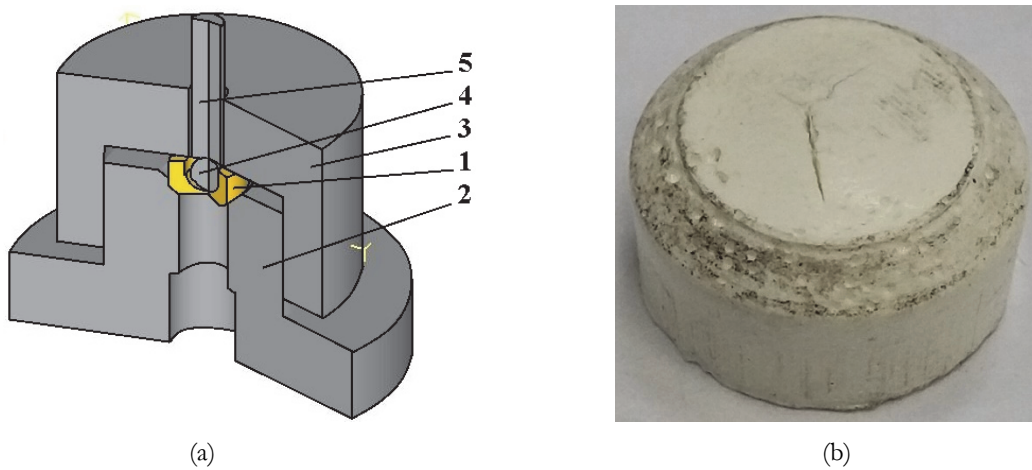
A thick-walled cup-shaped specimen made of reinforced epoxy resin: specimen installation diagram (a) and the fractured specimen after testing (b).
